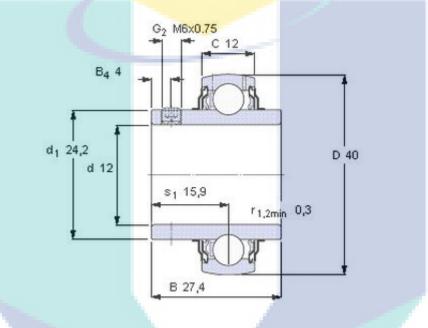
Ball Bearing With Deep Groove Specification
